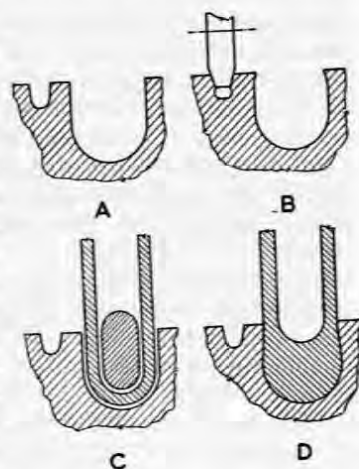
Connecting U-shaped sheet metal fins to a steel cylinder.
